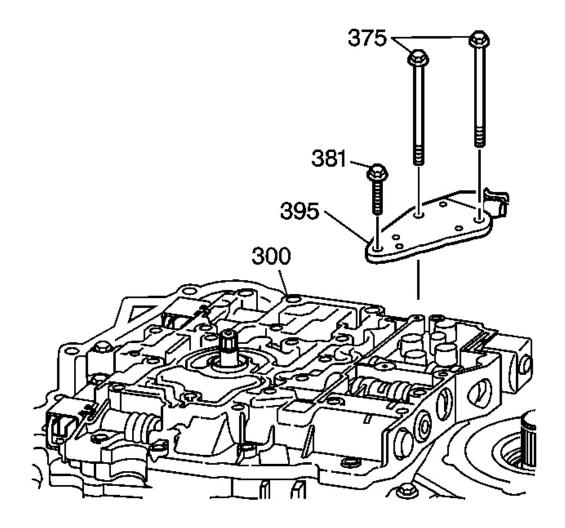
Removing/Installing Transmission Fluid Pressure (TFP) Manual Valve Courtesy of GENERAL MOTORS CORP.
